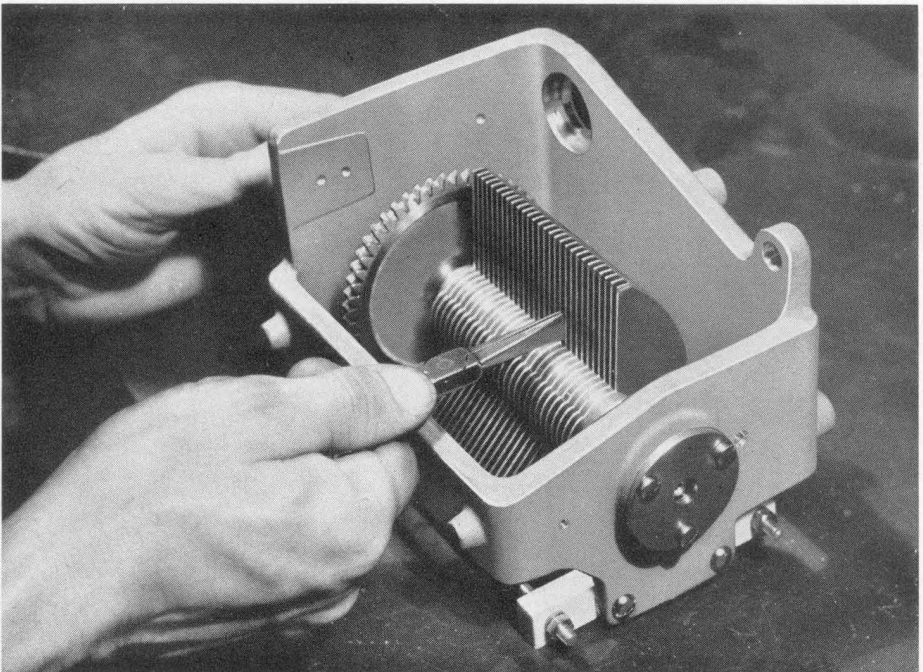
Straightening rotor plates after assembly. All plates must be parallel and all air gaps equal
